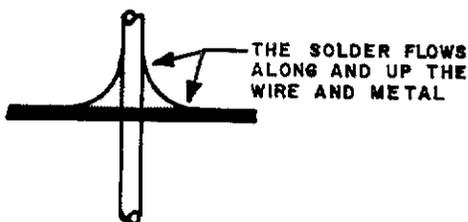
In a good solder connection the solder flows along the metal and presents a smooth, shiny appearance.
